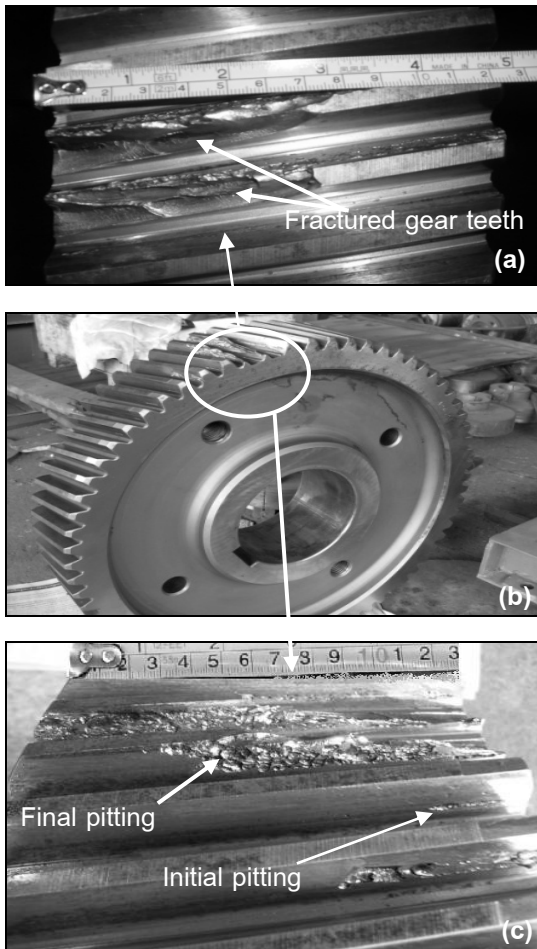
Fracture and pitting occurrence in the failed gear
